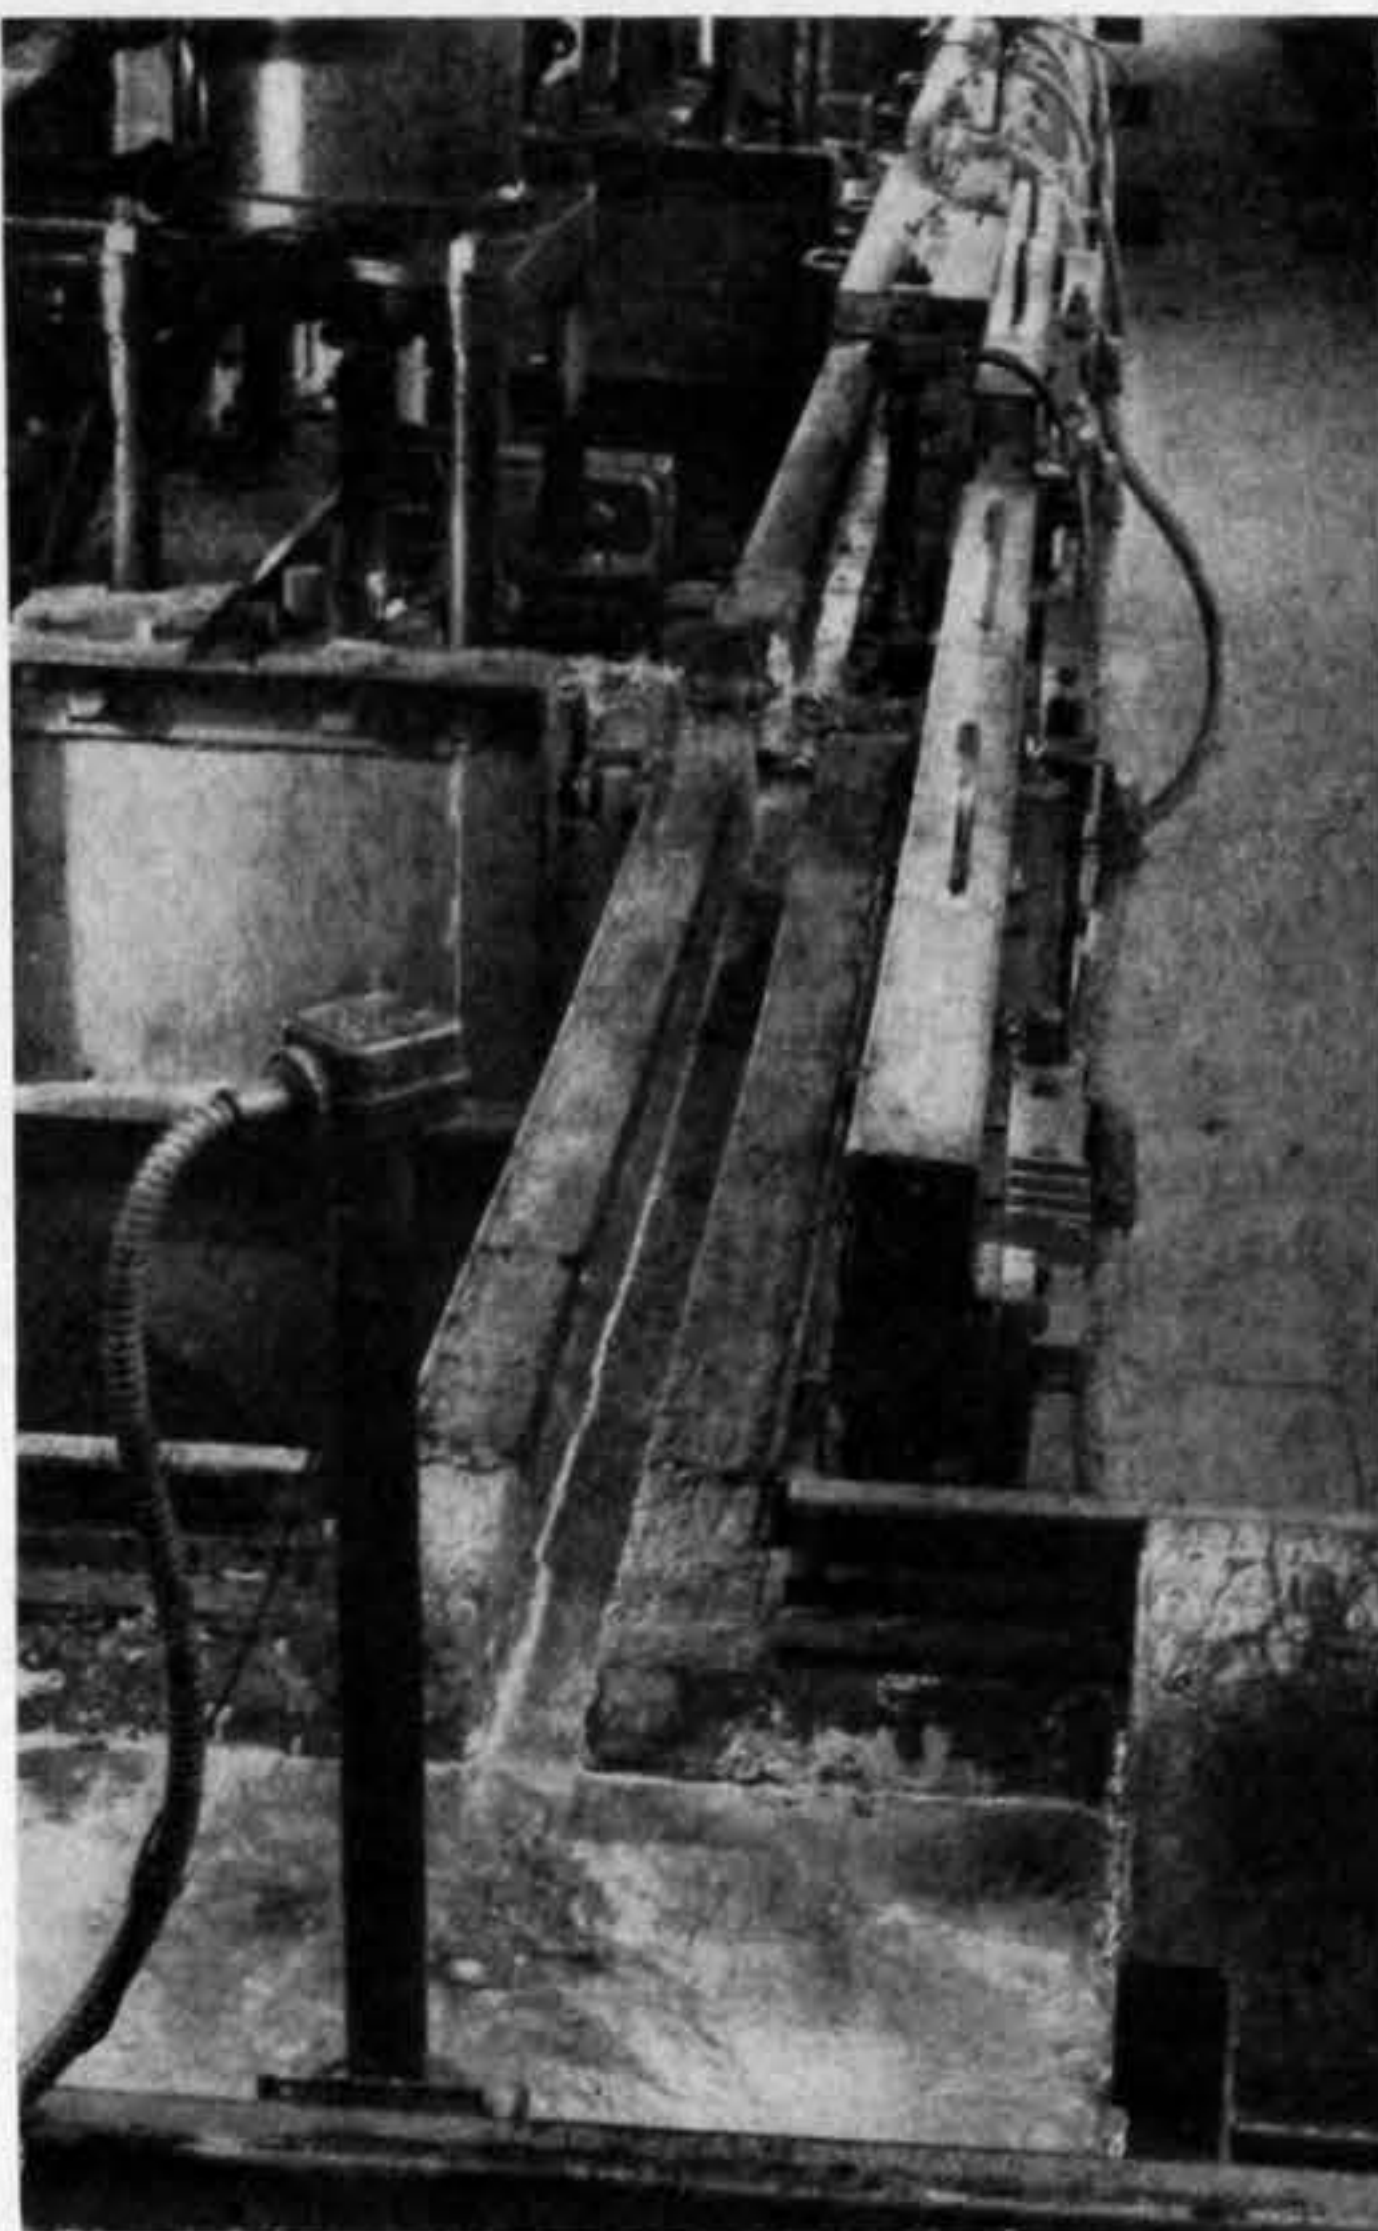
Metal melting furnace in foreground feeding induction holding furnaces of a line of three die casting machines through resistance heated launders. The launder covers have been removed to show flow of metal to the machines
